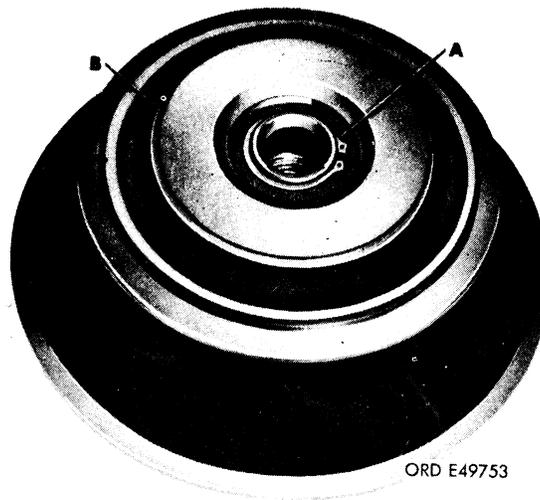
REMOVING OR INSTALLING RETAINING RING AND TURBINE BACK PLATE - TURBOCHARGERS 10912638 AND 53591-C-139552.
